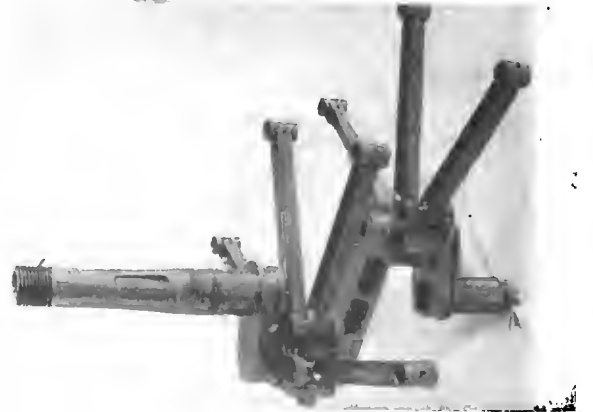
Two-throw Crankshaft of Esnault-Pelterie Seven-Cylinder Aeronautical Engine.
